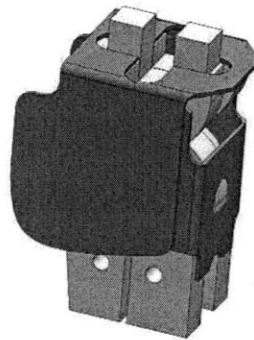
Squishbot1 active joint CAD model, with locking mechanism.
